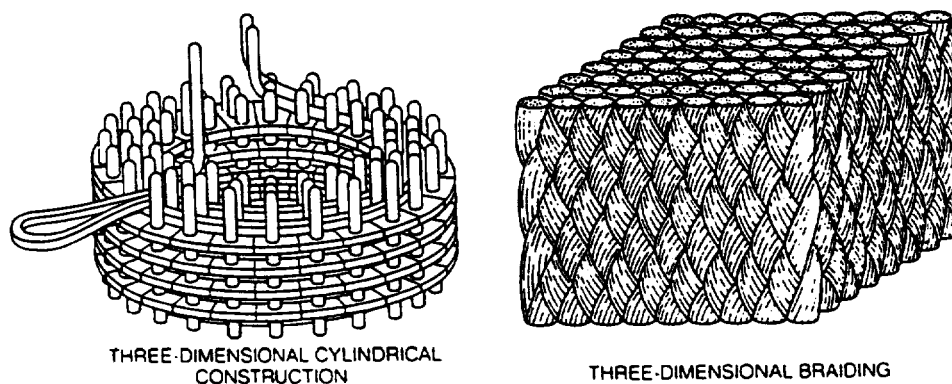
Examples of 3-D weave patterns. a) Cylindrical construction.
